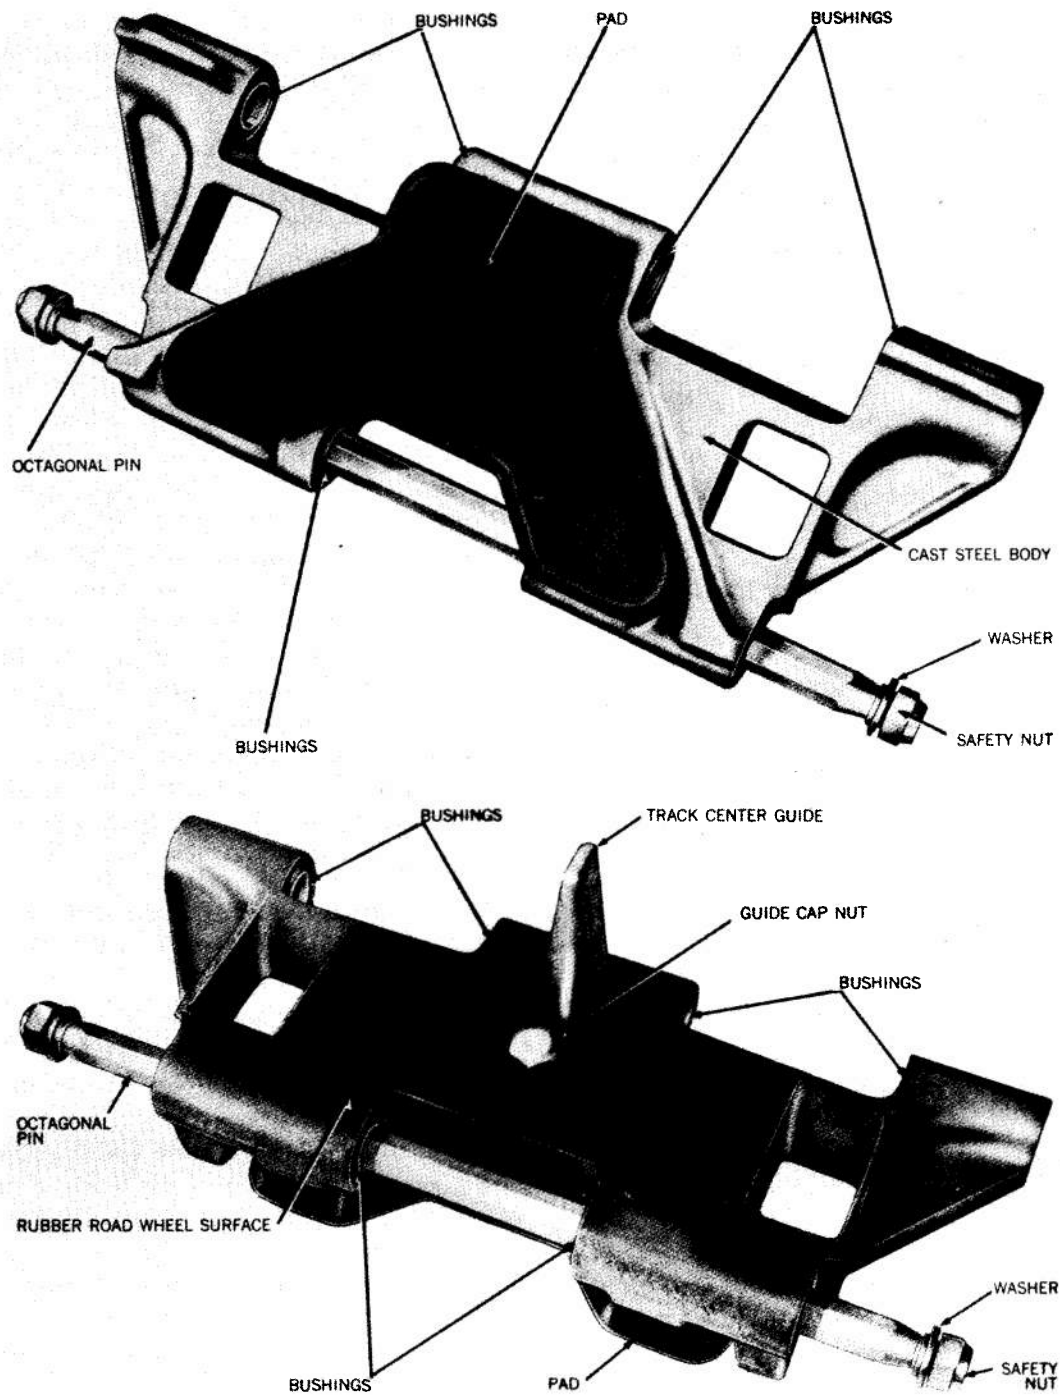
Single-Pin Track Shoe Assembly (T91E3)
